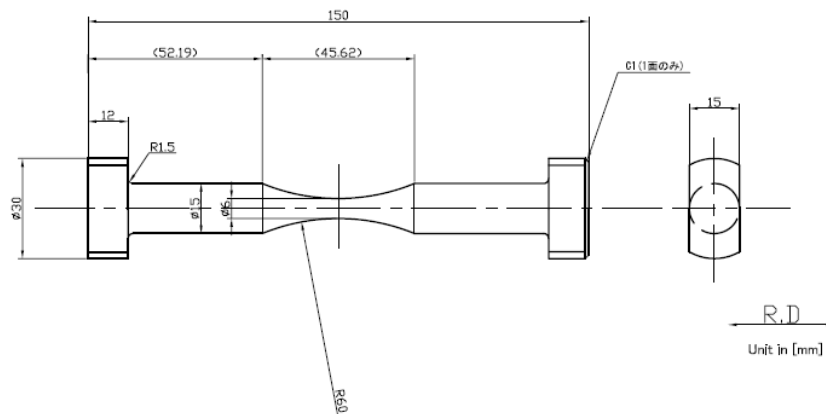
Hourglass-shaped round bar specimen used in the fatigue tests.
